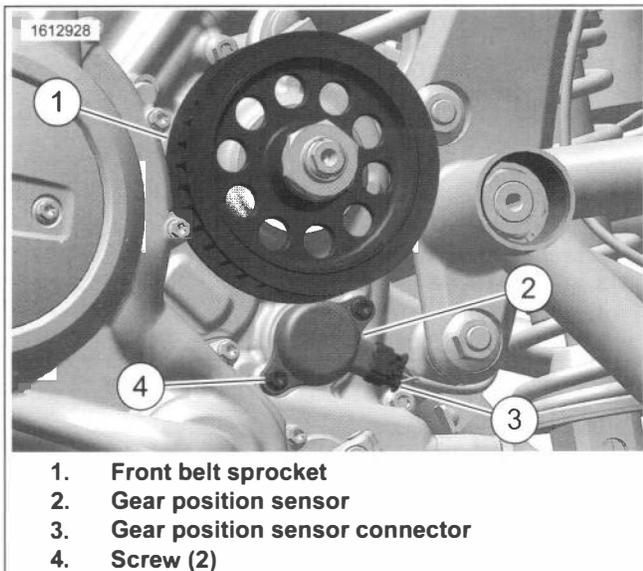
Gear Position Sensor Connector (Chain Removed for Clarity)
